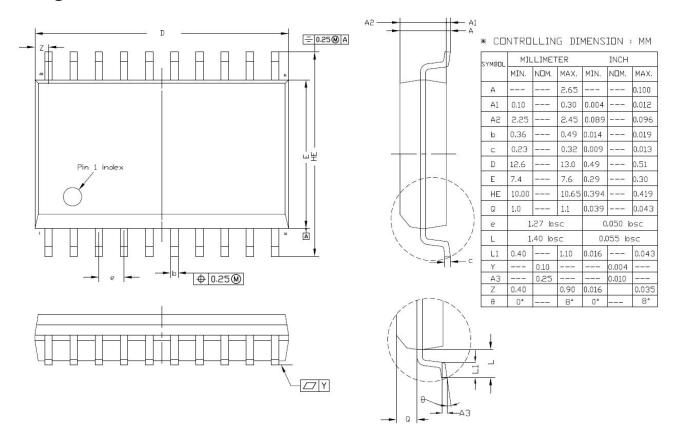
SOW20 Package Shape and Dimension in millimeters and inches
